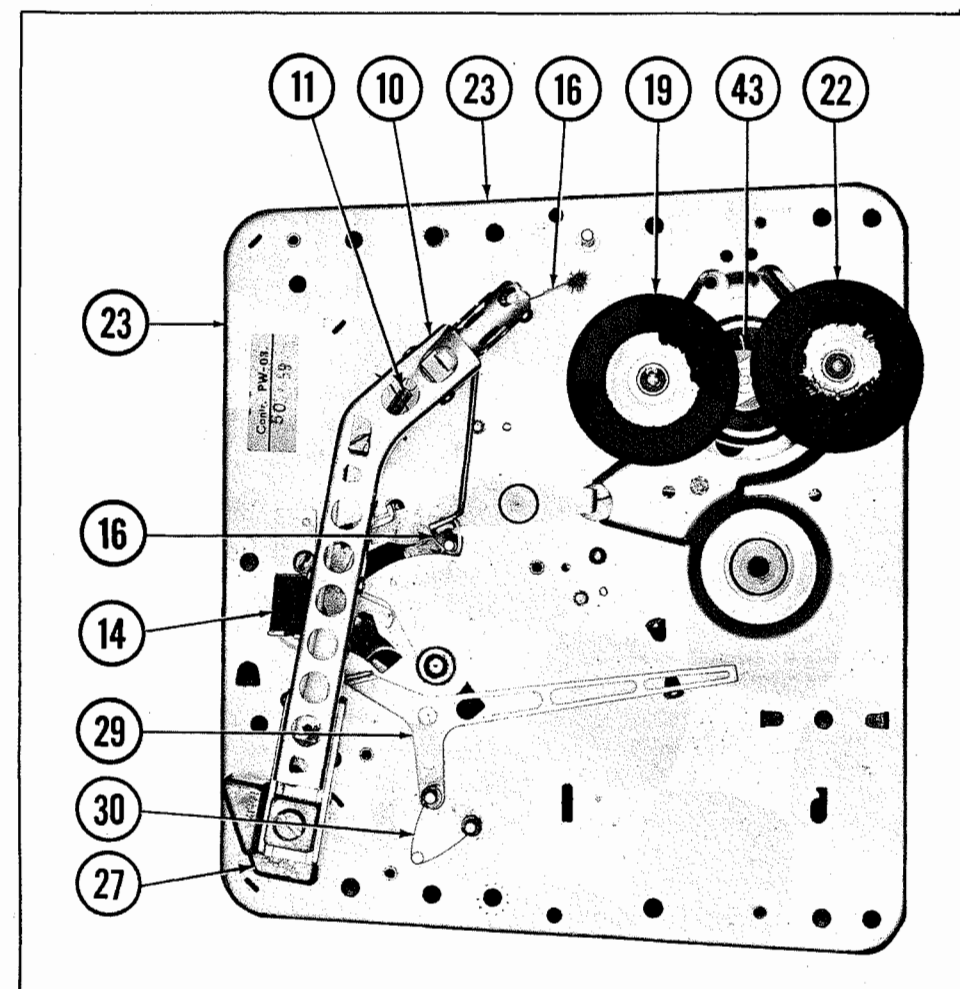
TOP VIEW OF MECHANISM WITH TURNTABLE AND BRACKET REMOVED
